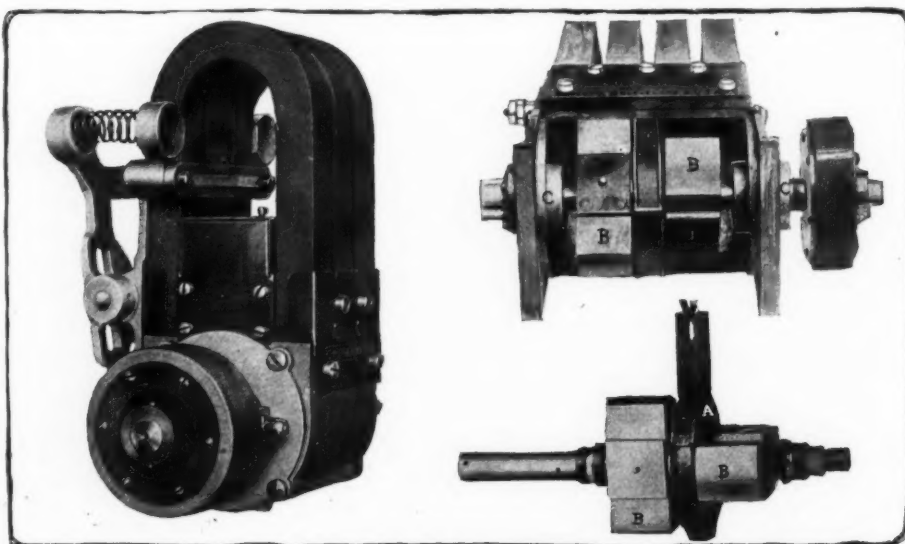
K-W magneto. Fig. 2—Interior of device. Fig. 3—Details of K-W rotor
